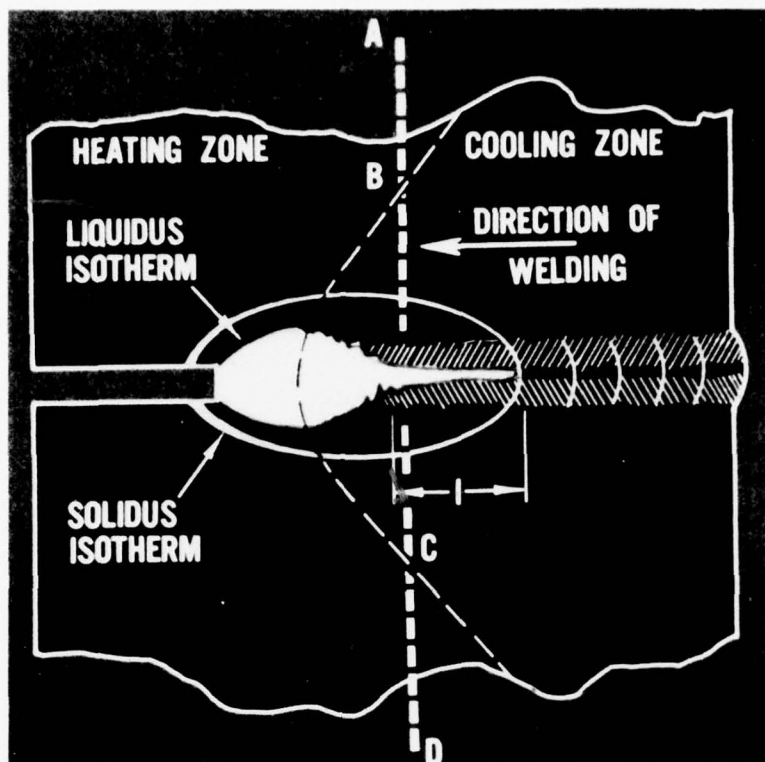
SCHEMATIC DIAGRAM OF THE THERMAL CONDITIONS WHICH OCCUR DURING FUSION WELDING.
